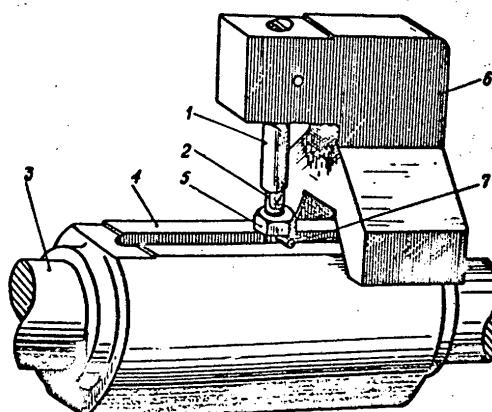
CUTTING TOOL ADJUSTMENT WITH THE AID OF A DEPTH GAUGE FOR BORING MASTER ROD CRANKPIN END BUSHING
